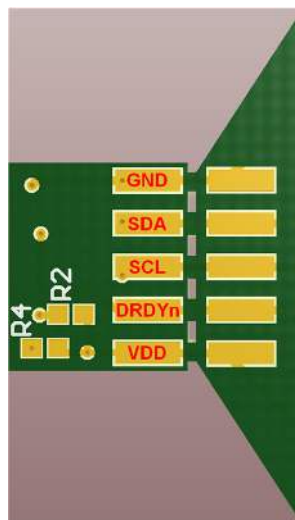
HDC1010EVM : Pads for I2C and Supply of the Smaller Sensor Module
